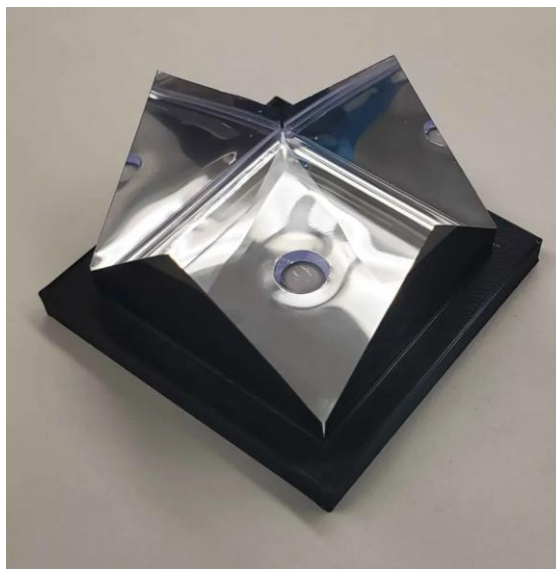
3D-Printed Fixture used to fold ESR Foil around scintillating tiles
